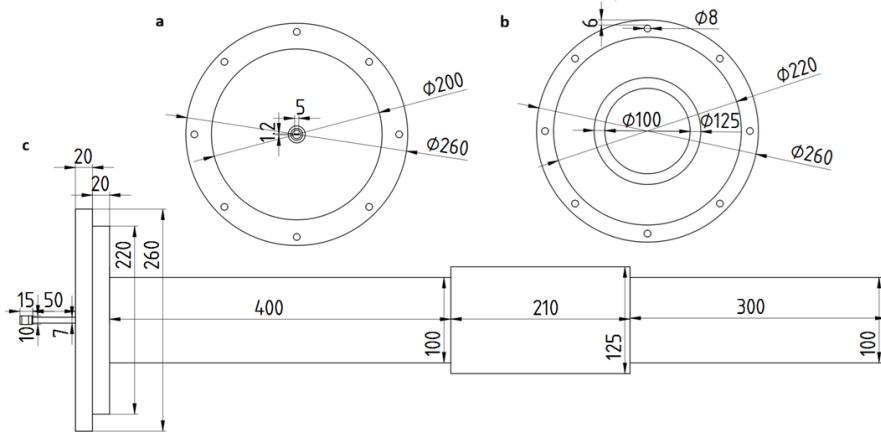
Technical drawing depicting the transfer arm viewed from the a) left, b) right, c) top, bottom, front, and back. Units of length are in millimeters.
